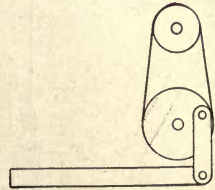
THE PULLEY AS USED IN THE SEWING MACHINE.
